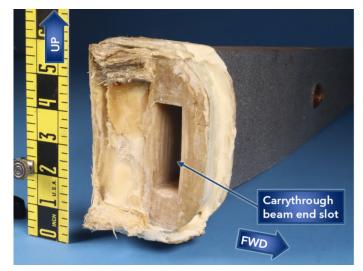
Inboard side of the right-wing spar fracture at the outboard end of the carry-through beam.
